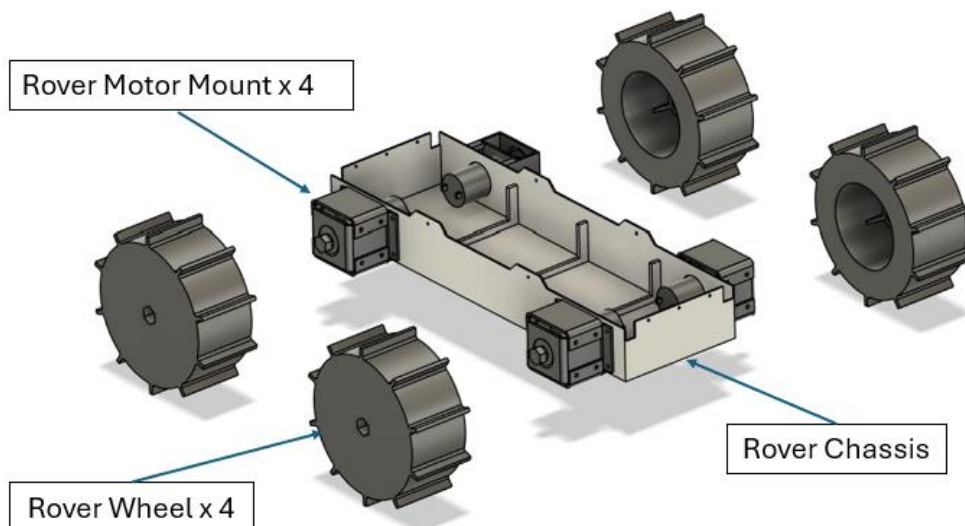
Exploded view of the latest rover subsystem showing the wheel, motor mount, and chassis structure.
